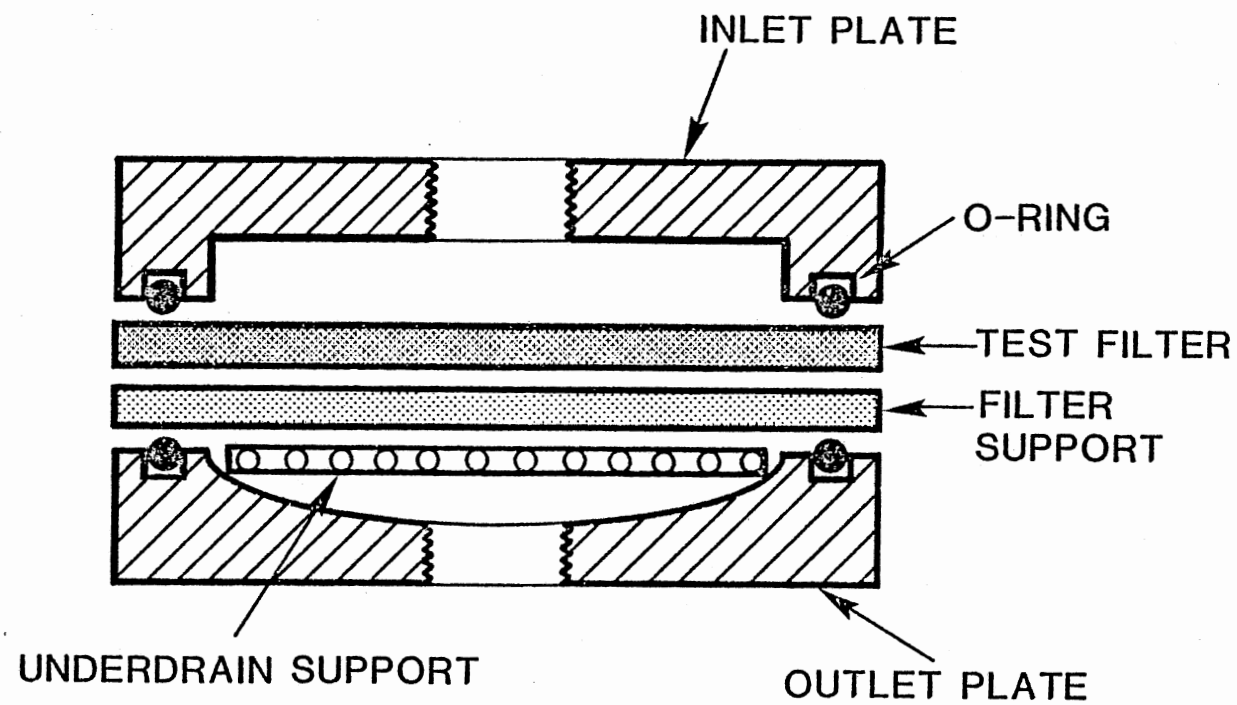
Schematic of Flat Sheet Filter Housing Assembly
